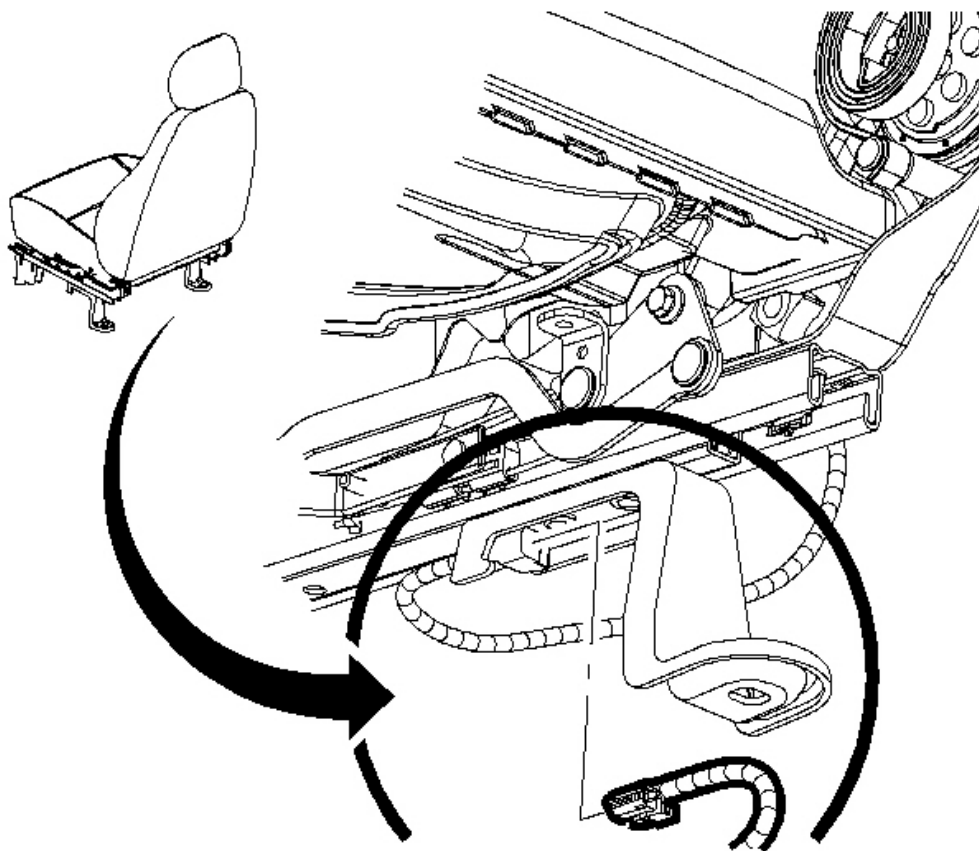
Seat Belt Buckle, Fastener & Bolt
